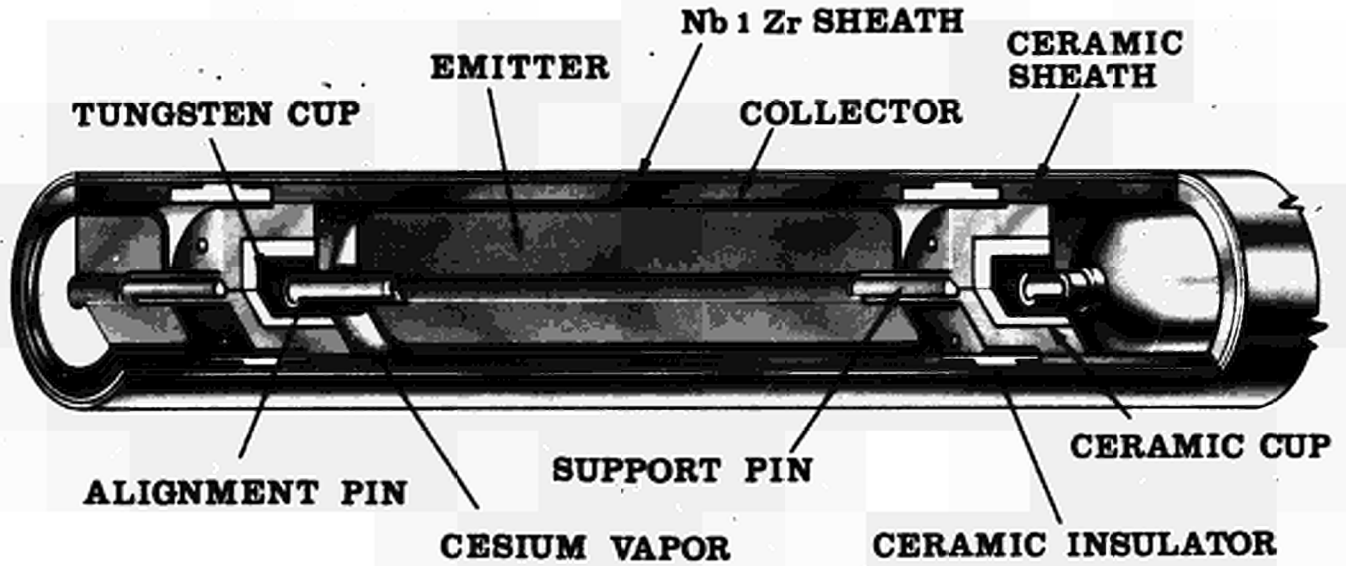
Cutaway drawing showing section of thermionic fuel rod.
